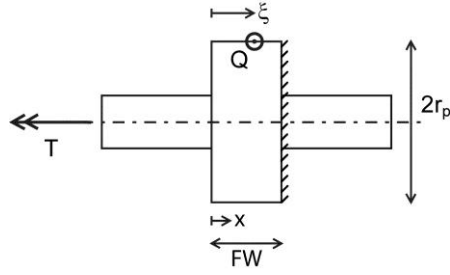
Loading and constraining scheme to calculate torsional deformation of a gear body.
